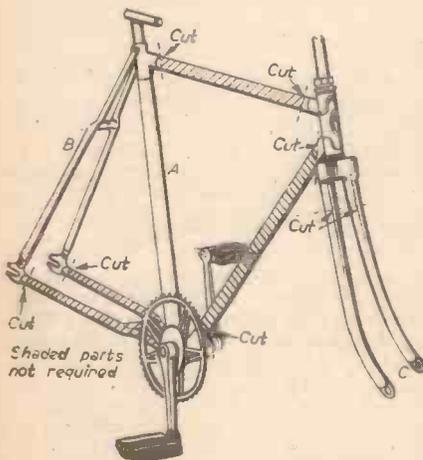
Showing the parts of a bicycle frame which are used for the telescope mounting.
